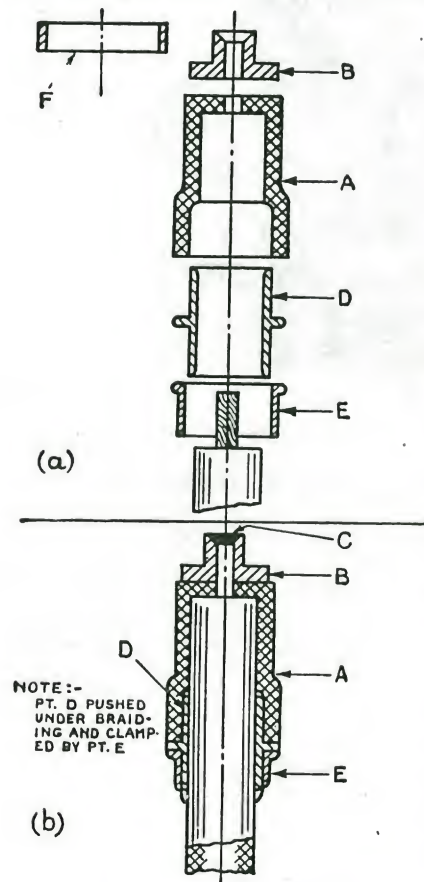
DIAGRAM SHOWING METHOD OF ASSEMBLING DISTRIBUTOR LEADS
